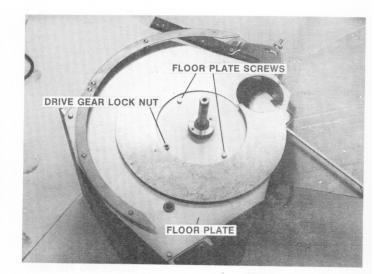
Floor Plate Screws, Magazine Drive Gear Shaft Lock Nut and Floor Plate
